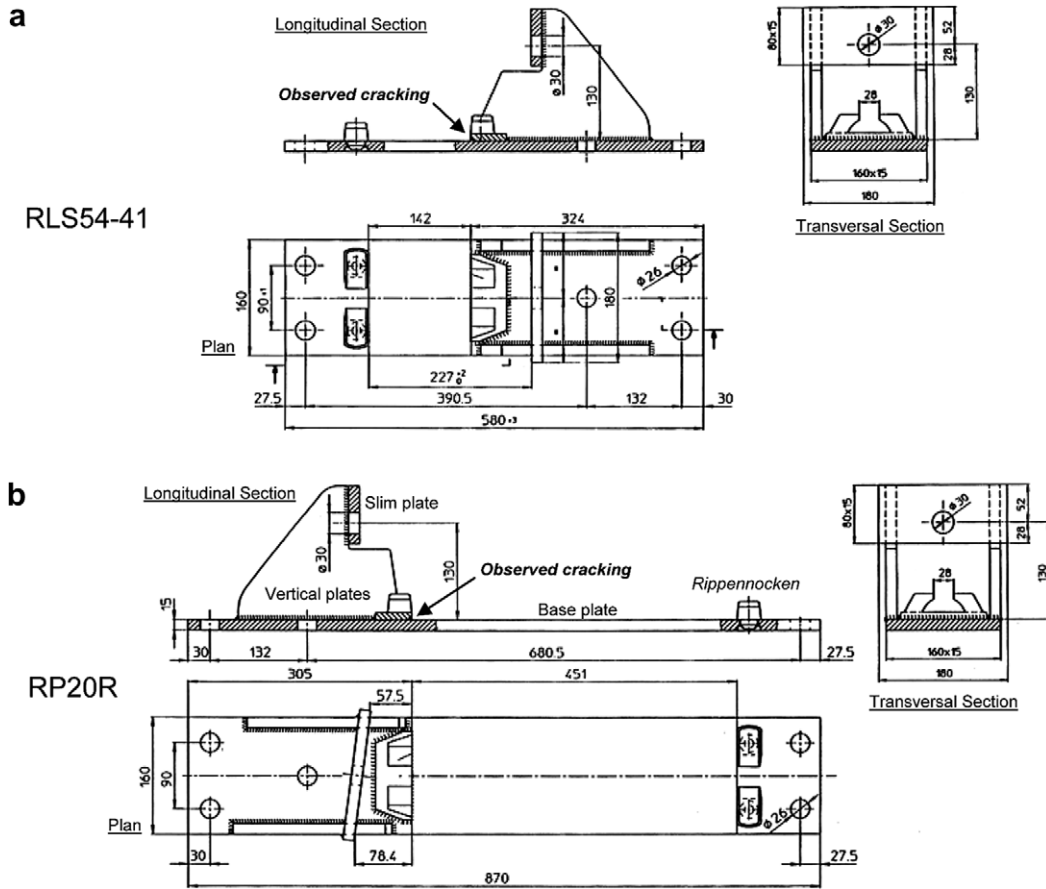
Plan and cross-sections of base-plate assemblies: (a) RLS54-41, and (b) RP20R.
